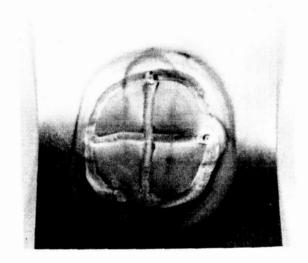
Circular Groove Weld Restraint Test Specimen for Plate Material
